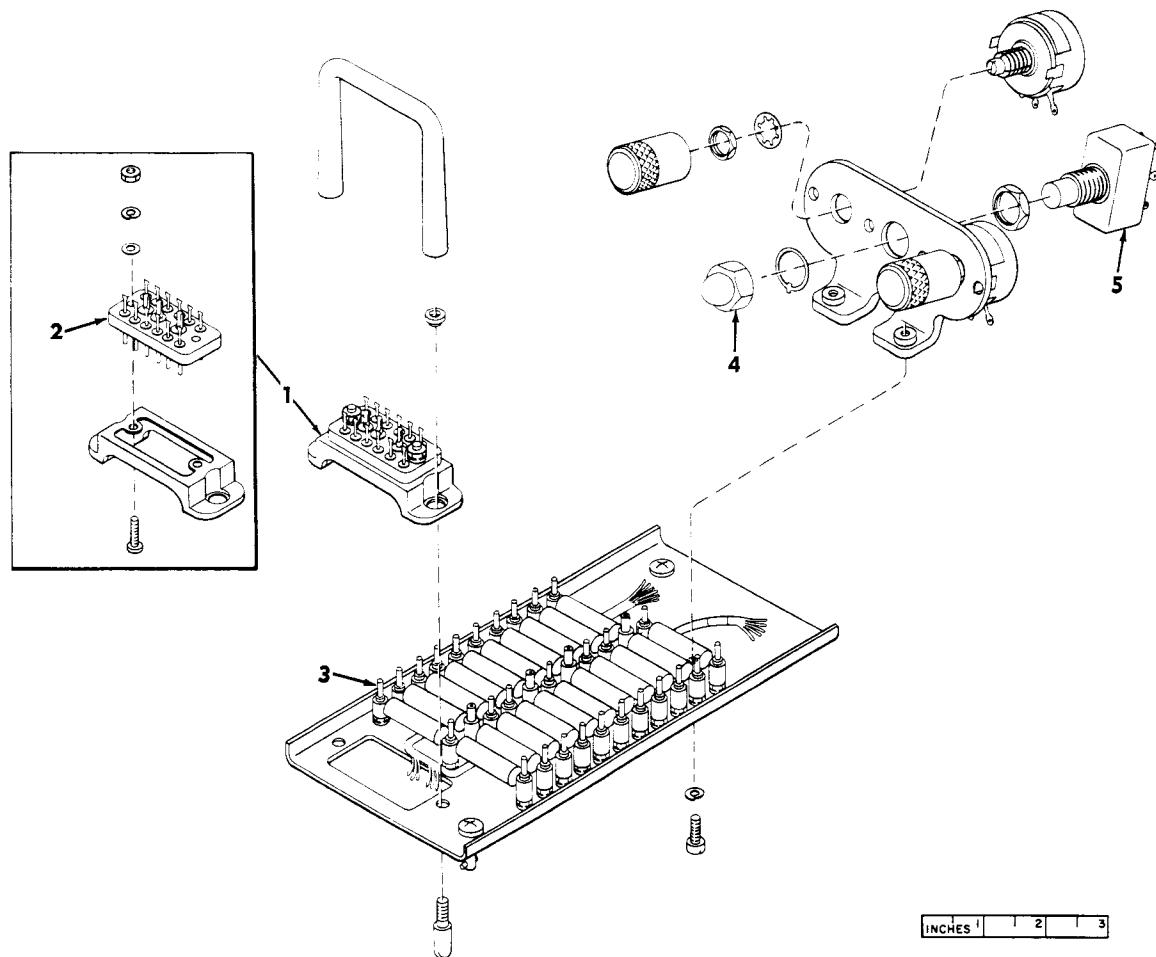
Control drawer, missile track (8511278) – partial exploded view
